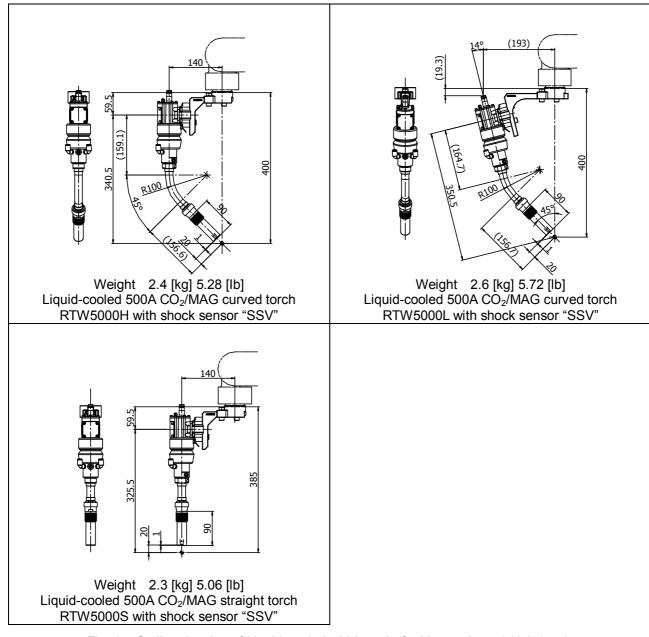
Outline drawing of Liquid-cooled 500A torch (for V type, A type) Unit (mm)
